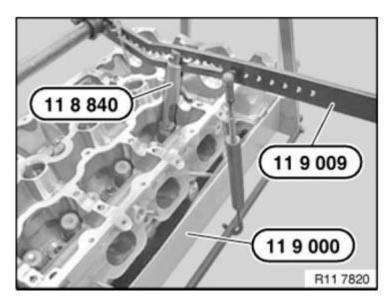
Pressing Down Valve Spring Using Special Tool 11 8 840 Courtesy of BMW OF NORTH AMERICA, INC.
